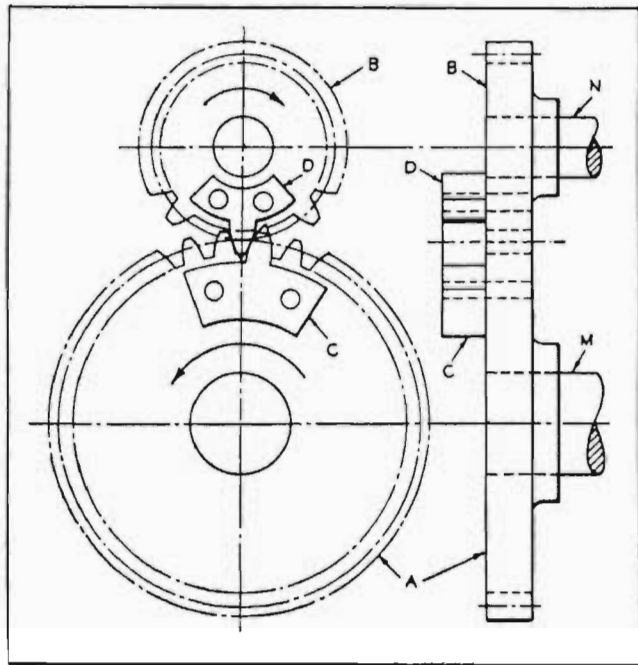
Mechanism that Permits Shaft *N* to Remain Idle during One-half Revolution of Driving Shaft *M*.
